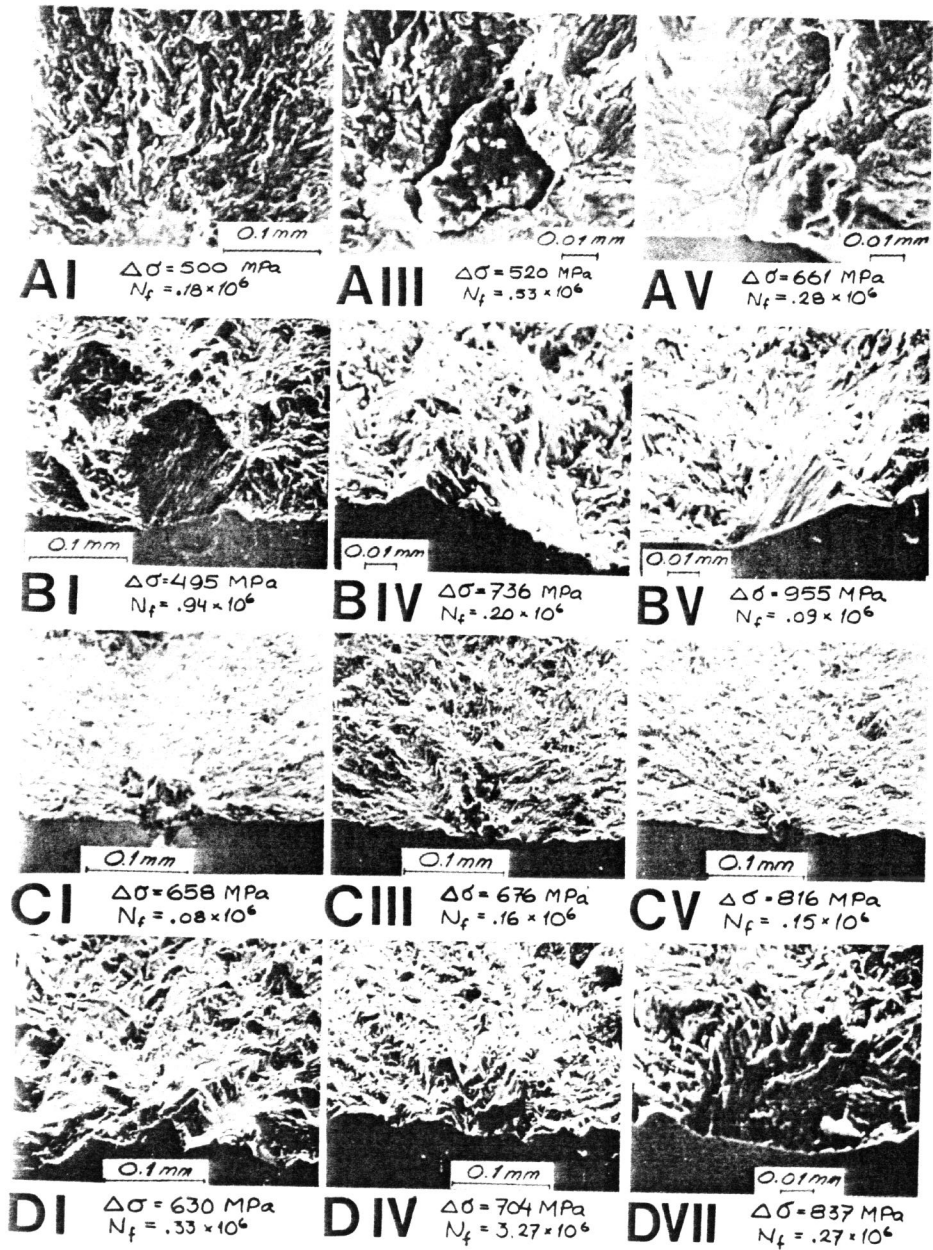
Cracking initiation sites.  $N_f$ =cycles to fracture of test specimen
